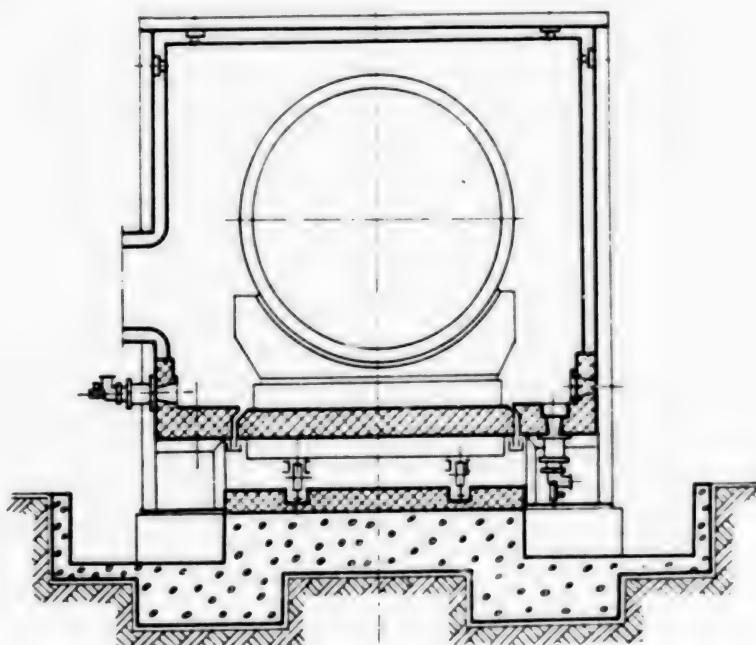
Car bottom furnace for the heat treatment of chemical plant and power industry equipment
